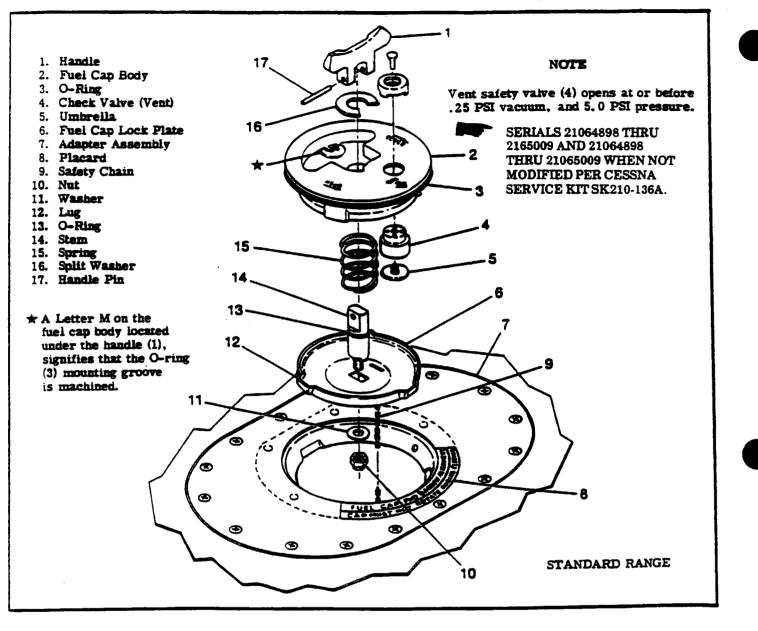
Fuel Filler Cap (Sheet 1 of 2)
